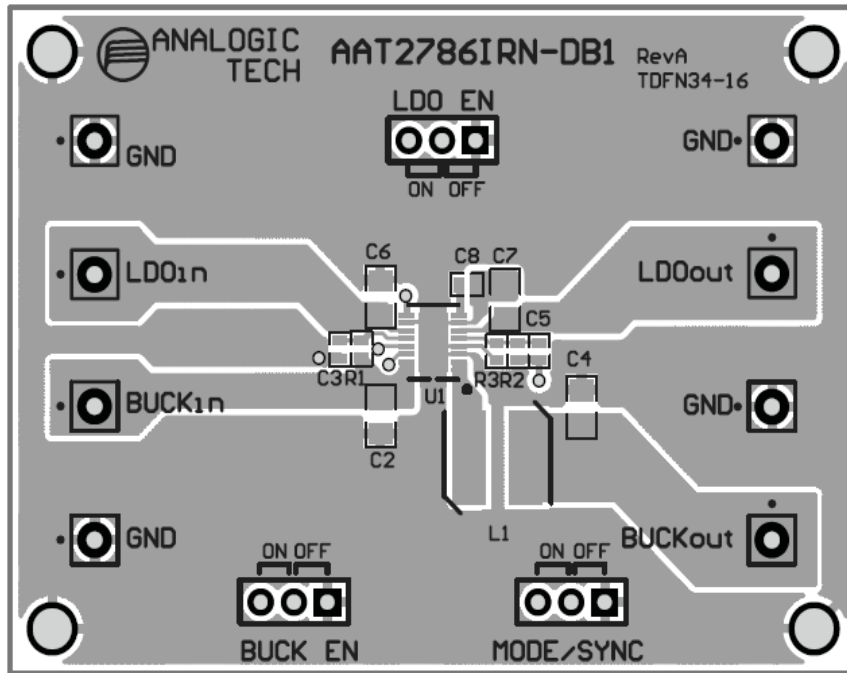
AAT2786 Evaluation Board Component Side Layout.
